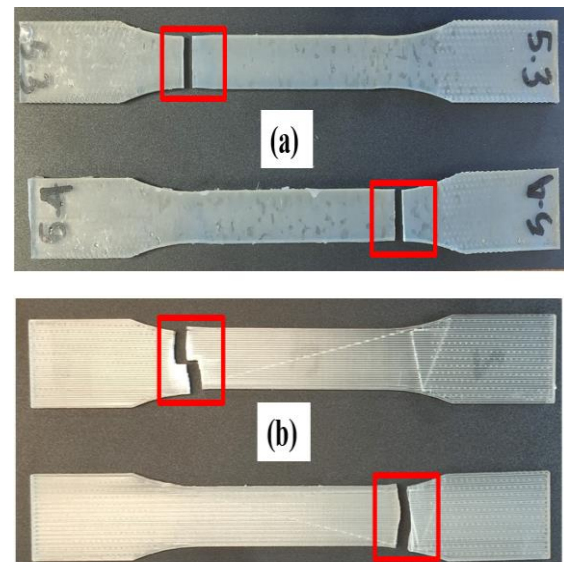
Fracture pattern for tensile specimens (a) compression molded; and (b) 3D printed specimens.
